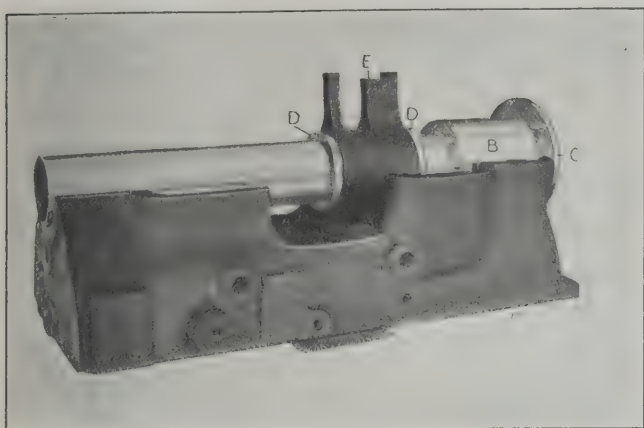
Method of Gaging Clearances for Spindle Gears in a Lathe Headstock
